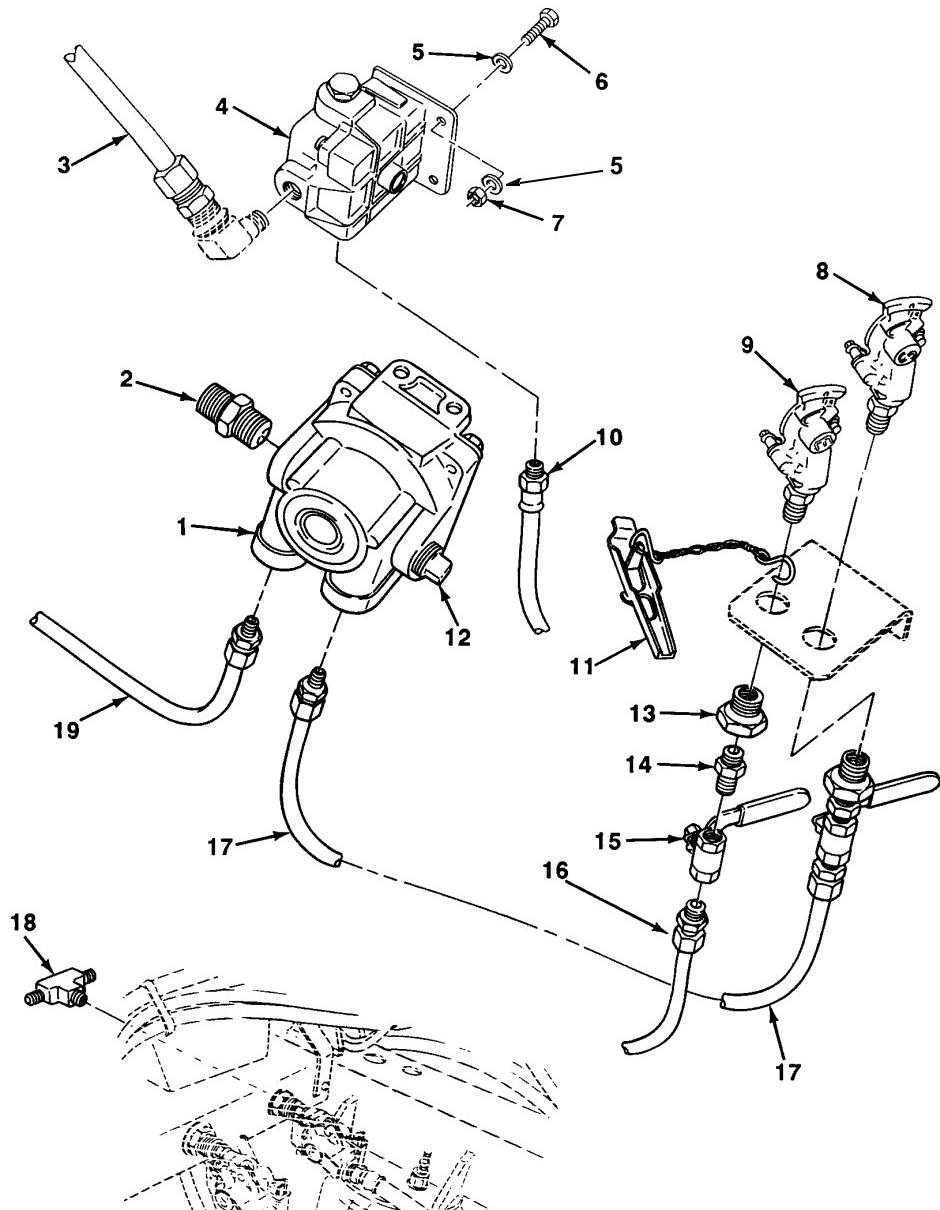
Airbrake Relay Valves, Lines, and Fittings, Rear.
